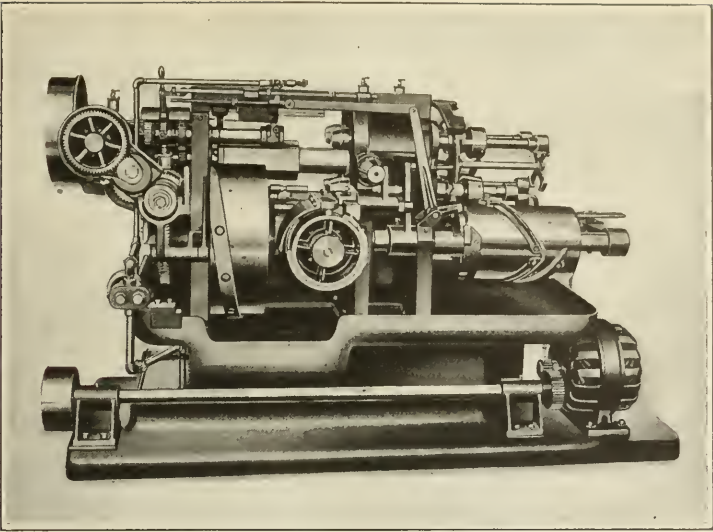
1 1/4-inch Gridley Multiple-spindle Automatic Screw Machine with Motor Drive
